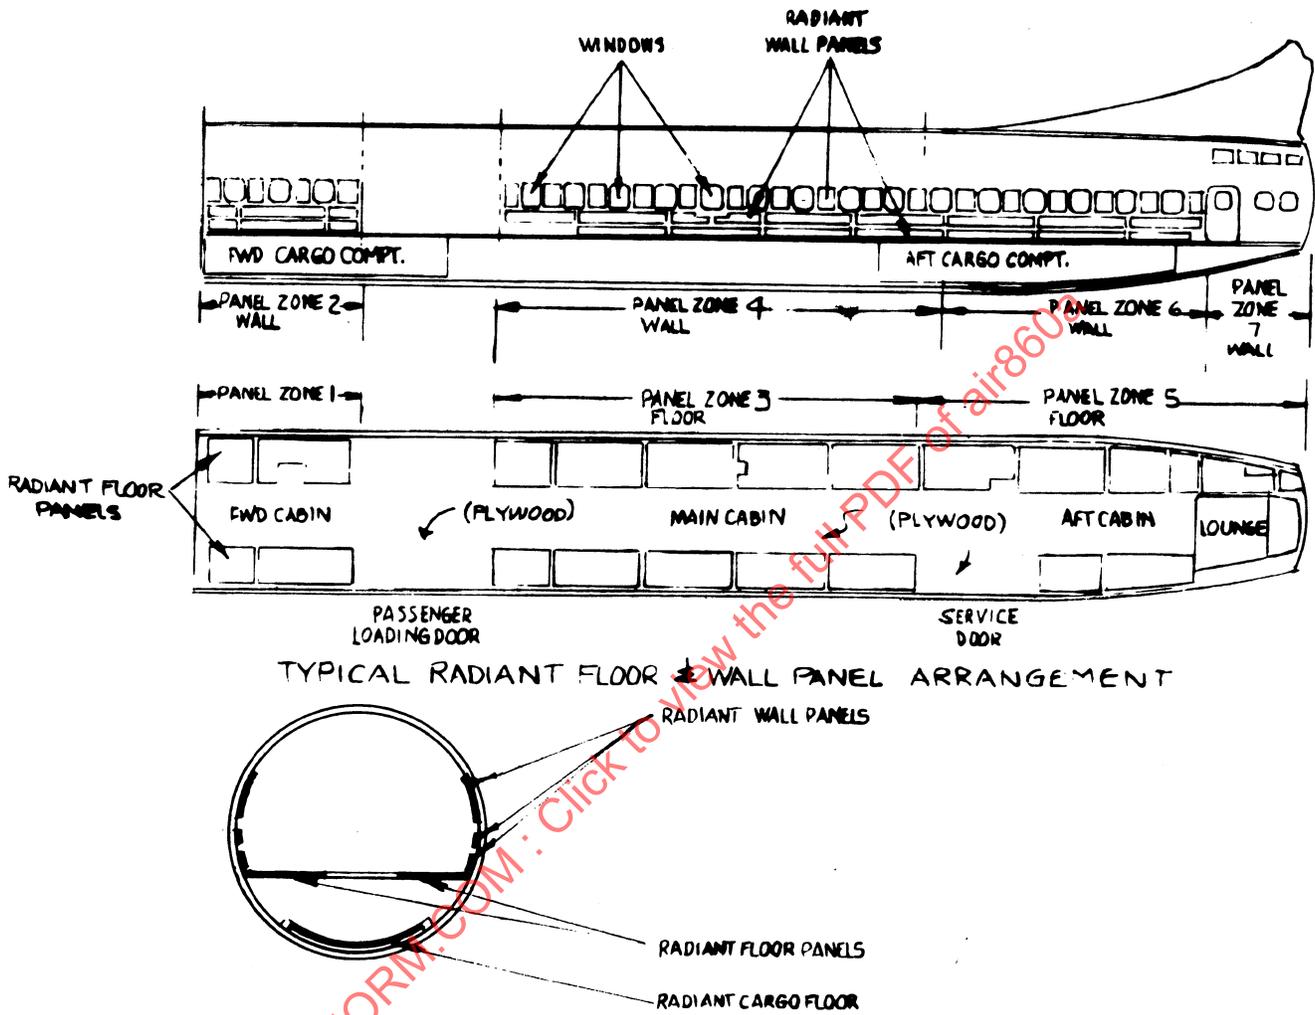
Cabin Wall and Floor Radiant Panels
